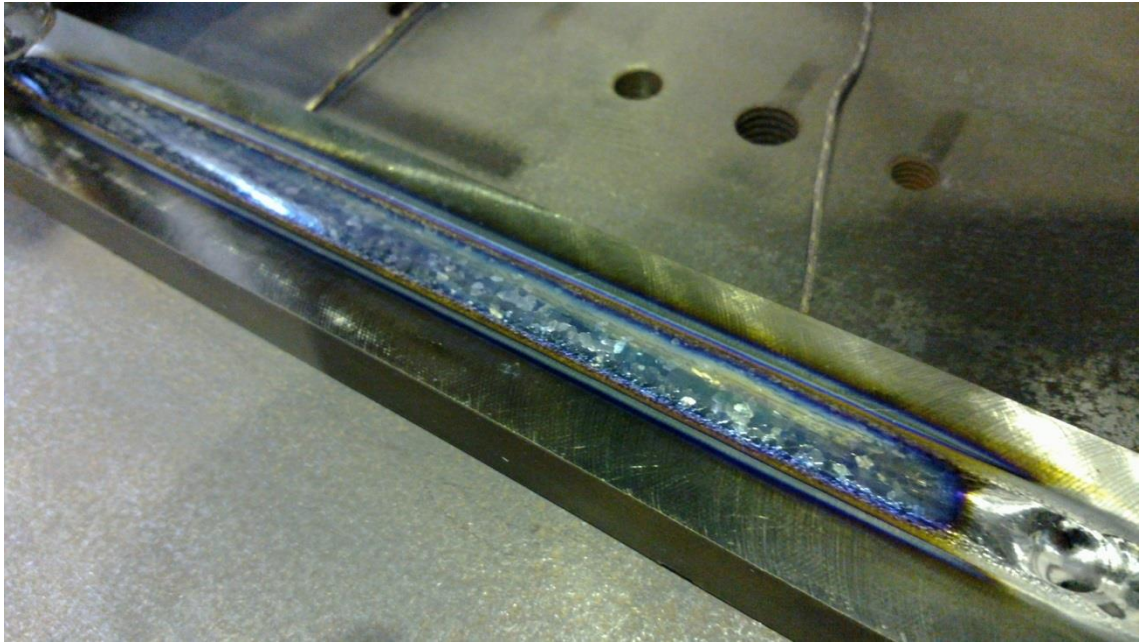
Photograph of weld bead appearance for bead-on-plate trial E (multi-pass with trailing shielding) after 25 welding passes showing silver bead appearance with large prior  $\beta$ -Ti grains in the fusion zone and reinforcement and accompanying crater at the end of the weld bead.
